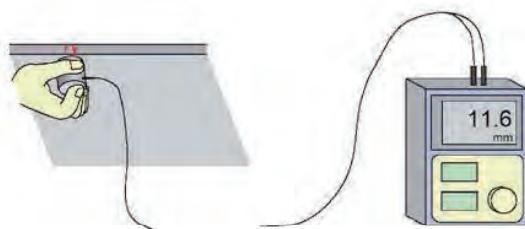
Plate Thickness Inspection by Ultrasonic Inspection
